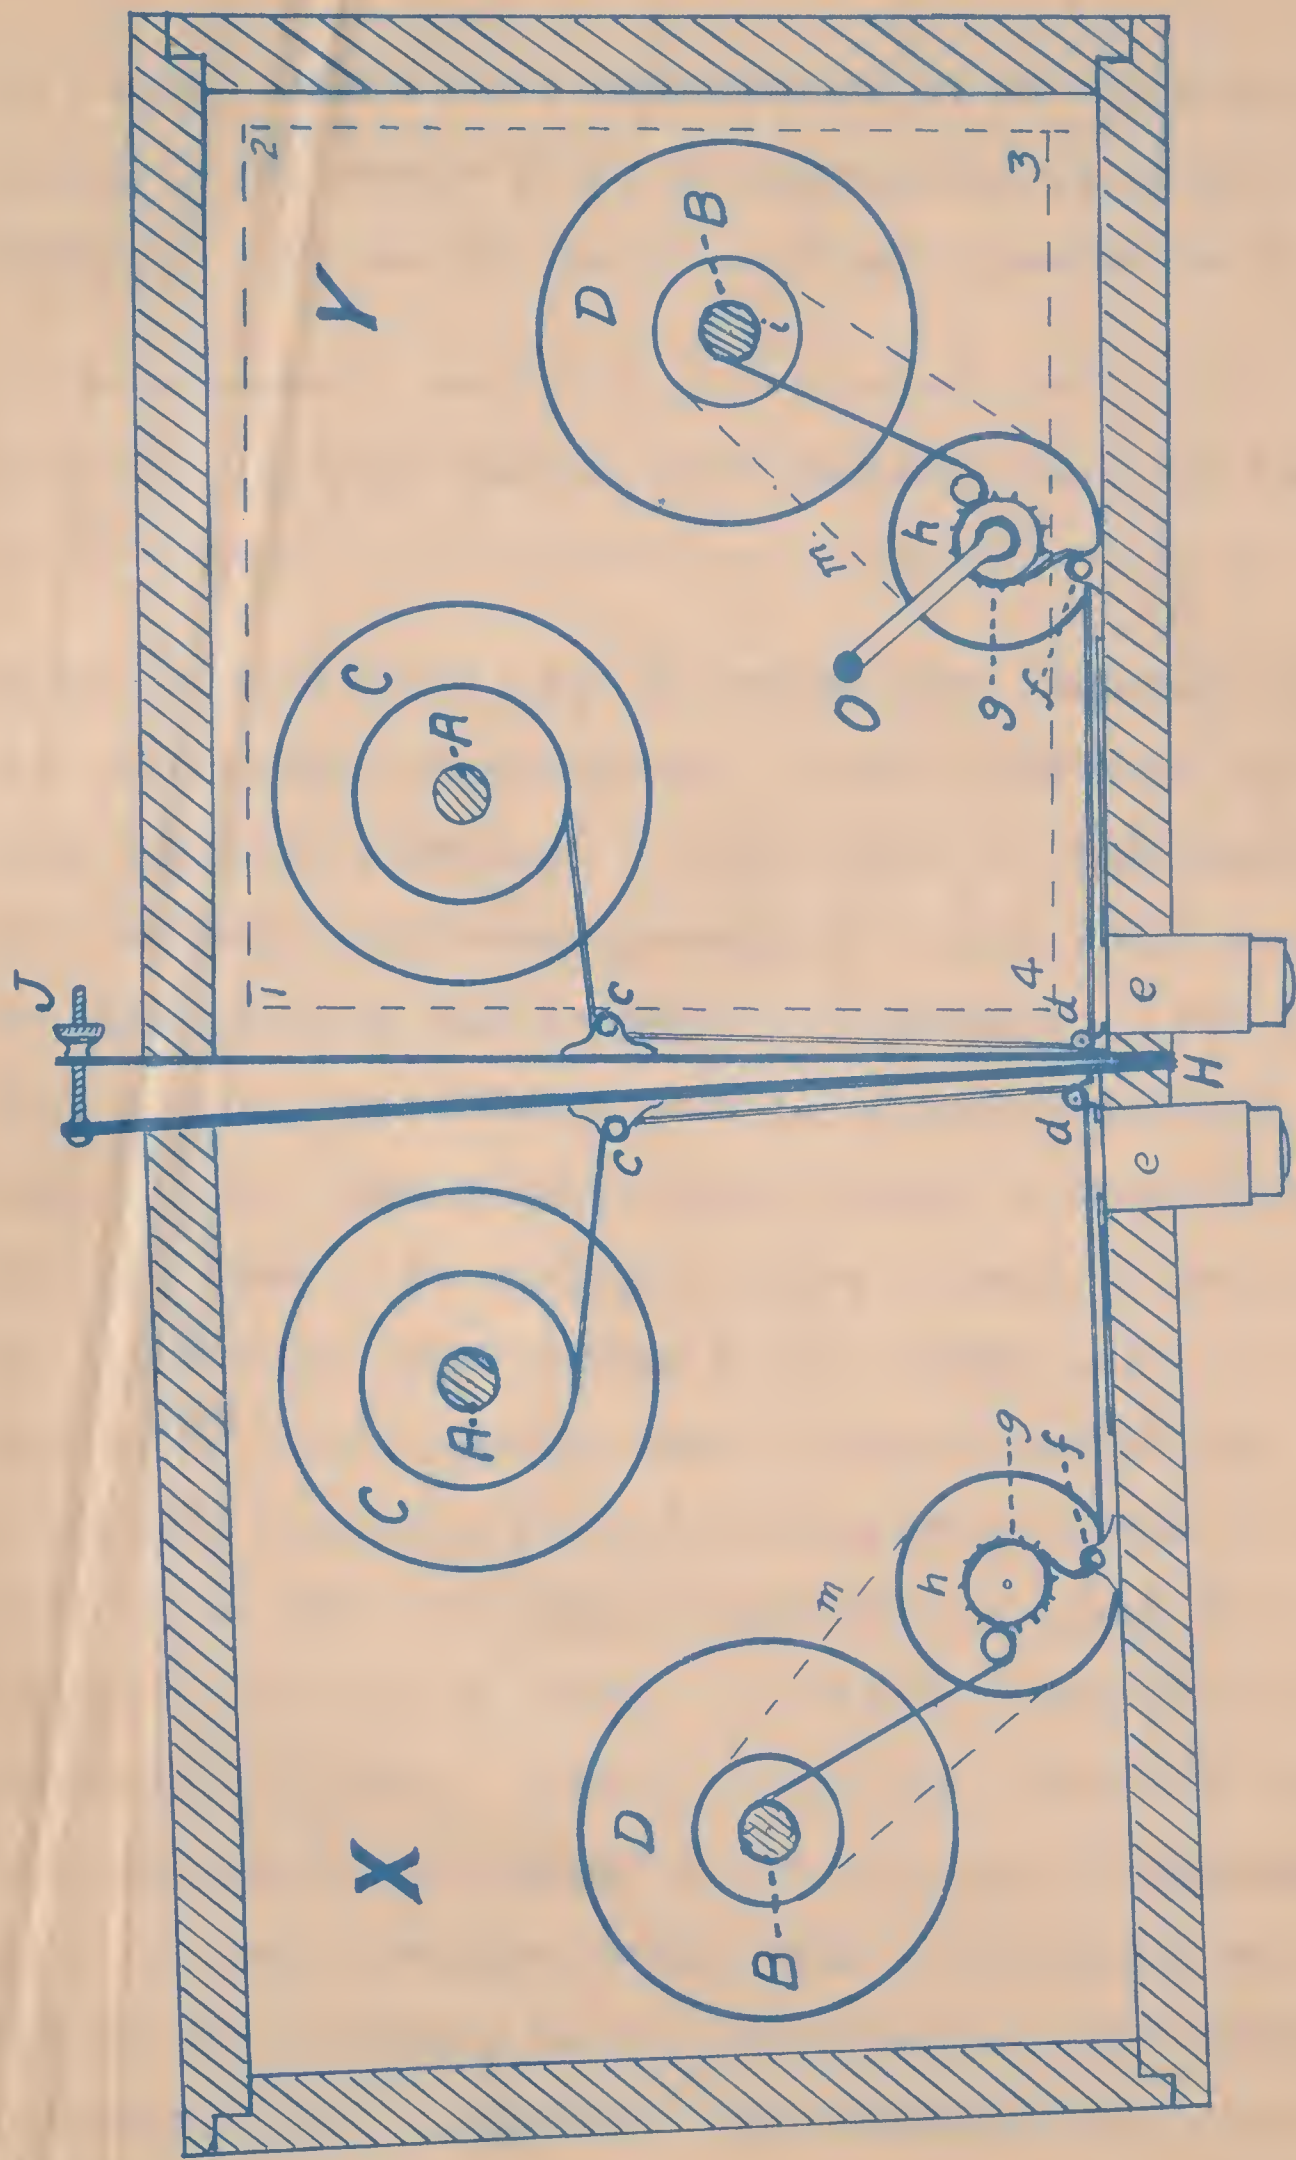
CROSS SECTION VIEW OF CAMERAS - SHOWING CONSTRUCTION AND METHOD OF THREADING FILM.
